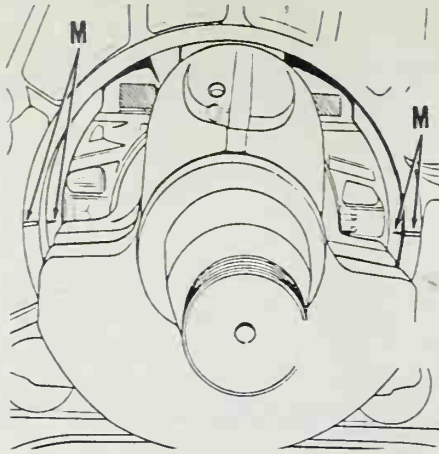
Align crankshaft support and crankcase marks (M) as shown.
